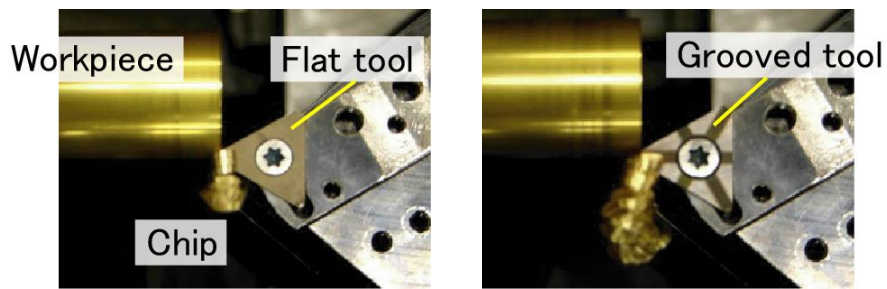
Cutting experiment with grooved straight-edge tool
